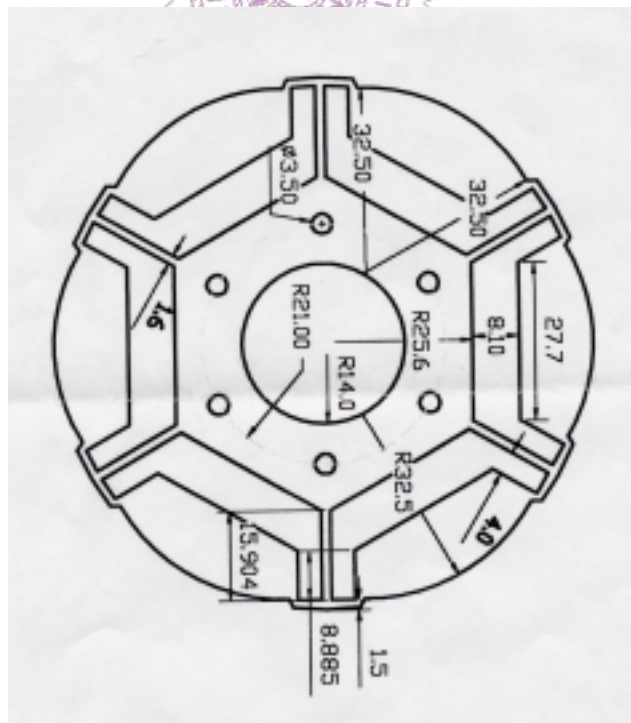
A rotor cross section view of the tested IPMSM.
